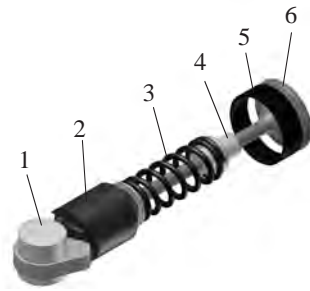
The scheme of the researched seat insert - valve - valve guide assembly, driven by camshaft; 1 - camshaft, 2 - valve lifter, 3 - valve spring, 4 - valve guide, 5 - seat insert, 6 - valve
